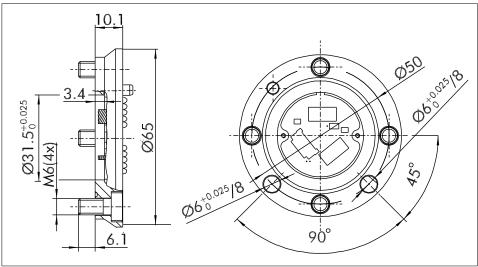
Dimensions of Flat tool change system adapter FWA (connection tool side)
